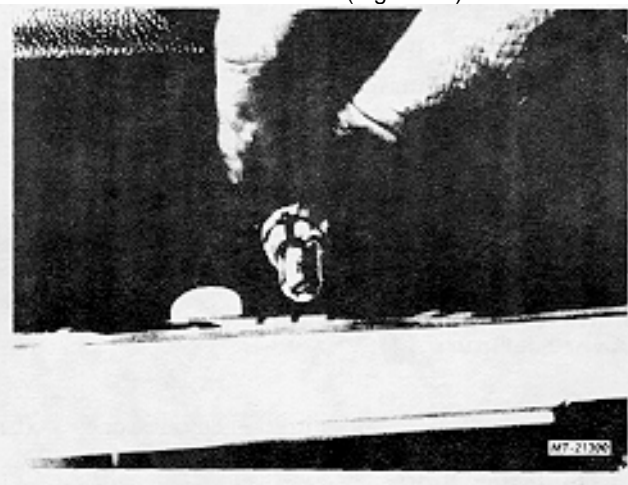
Removing Bulb and Bulb Socket from Cluster
